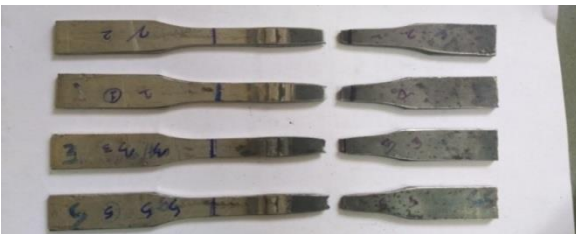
Broken specimen welded by MIG welding after transverse tensile testing.
